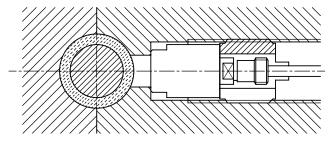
Sensor with machined front (Types 6152BA... and 6152BB only)
